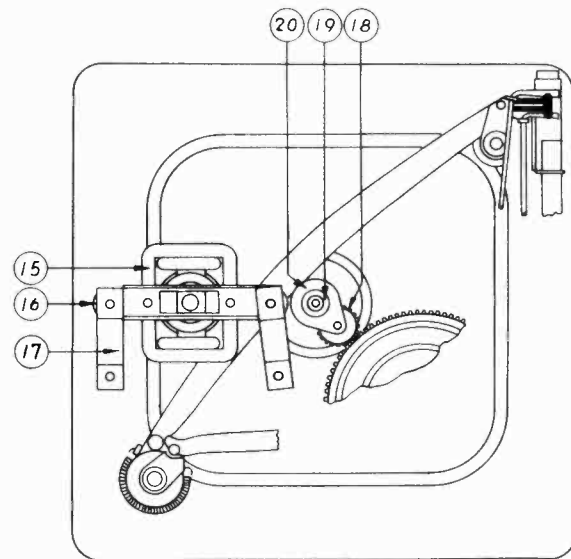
PART LOCATIONS — BOTTOM OF CHANGERS
